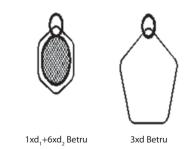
View of deformed wire in cross-section of "Betru" steel cord
